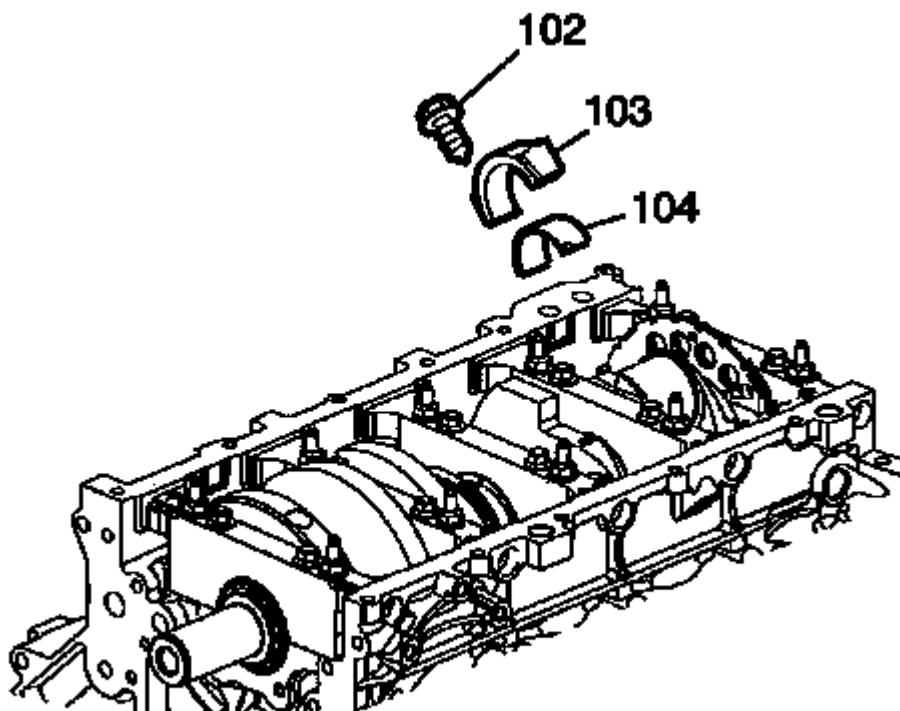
Connecting Rod Bolt, Cap & Bearing
